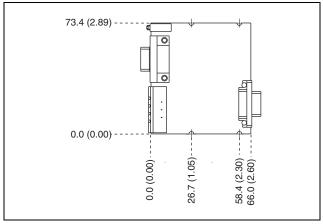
NI 9505E Dimensions in Millimeters (Inches)
